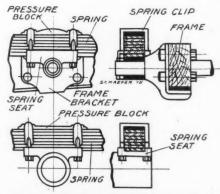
Method of Mounting I. H. C. Full-Elliptic Rear Spring
